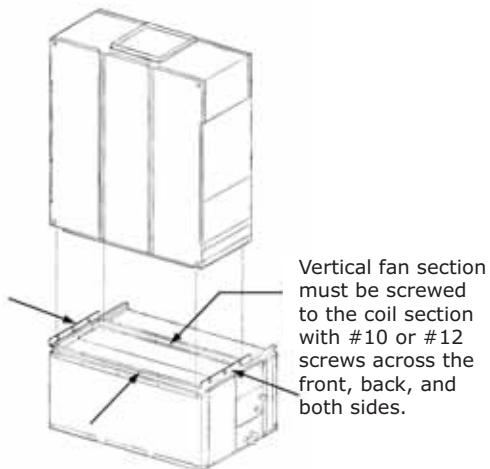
Mounting feet installation for vertical fan kit and steam coil module
